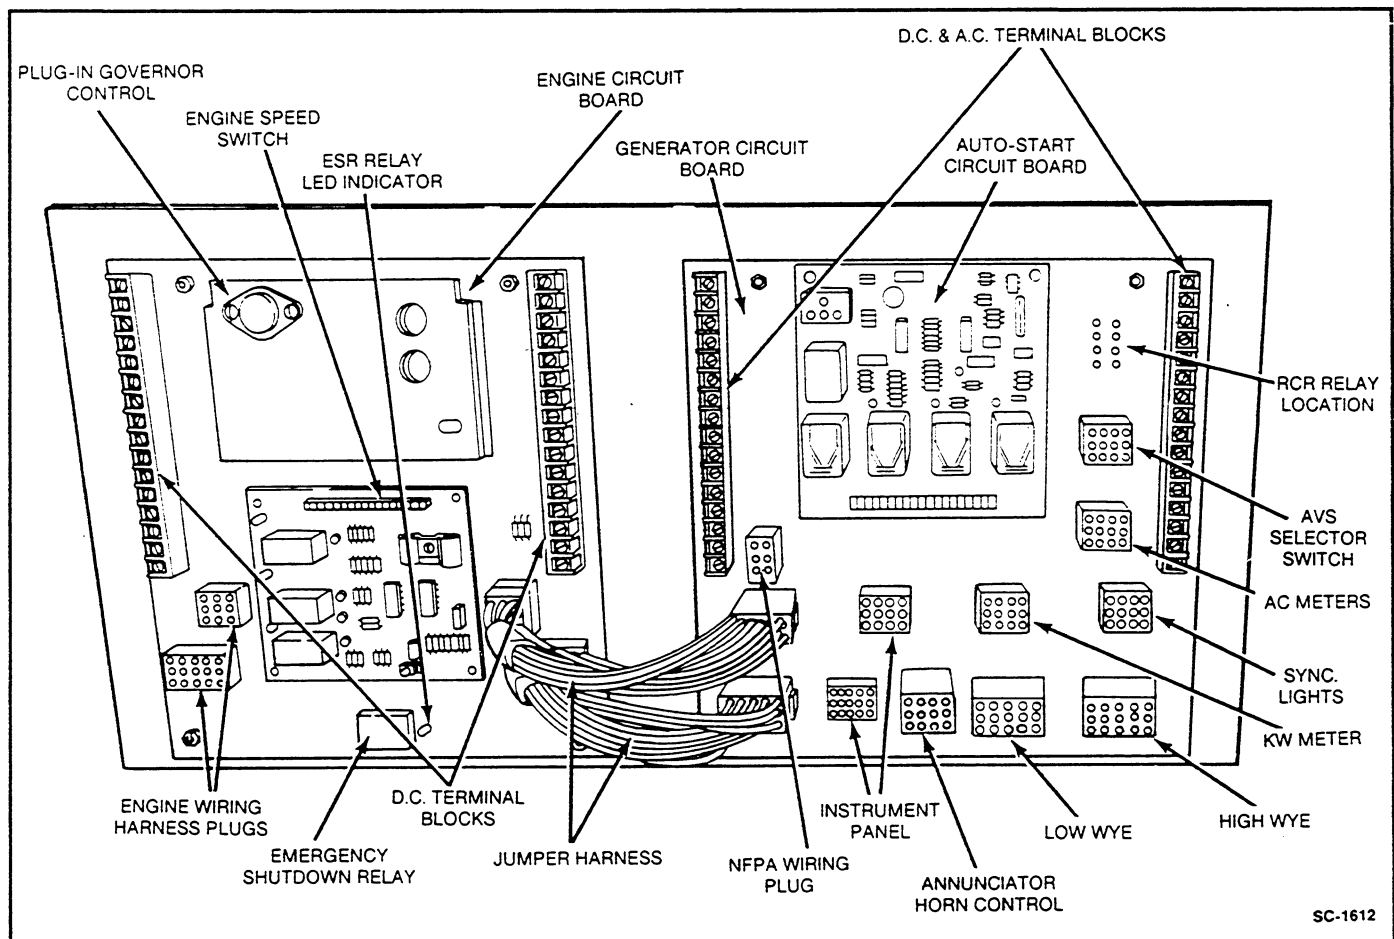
ENGINE AND GENERATOR PRINTED CIRCUIT BOARD CONTROLS
